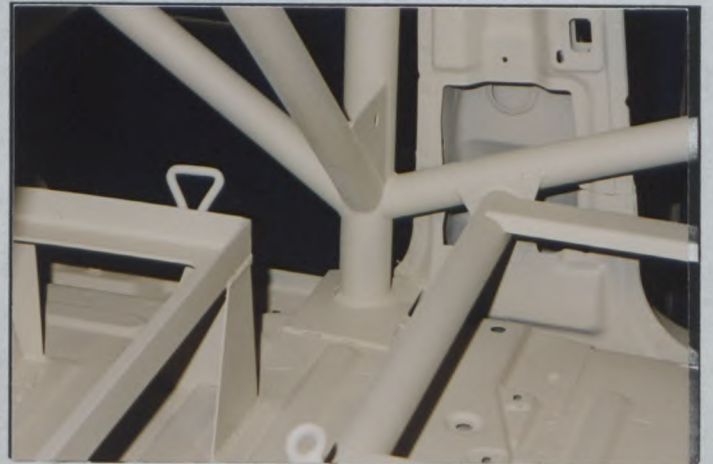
MAIN HOOP TO FLOOR-RIGHT
